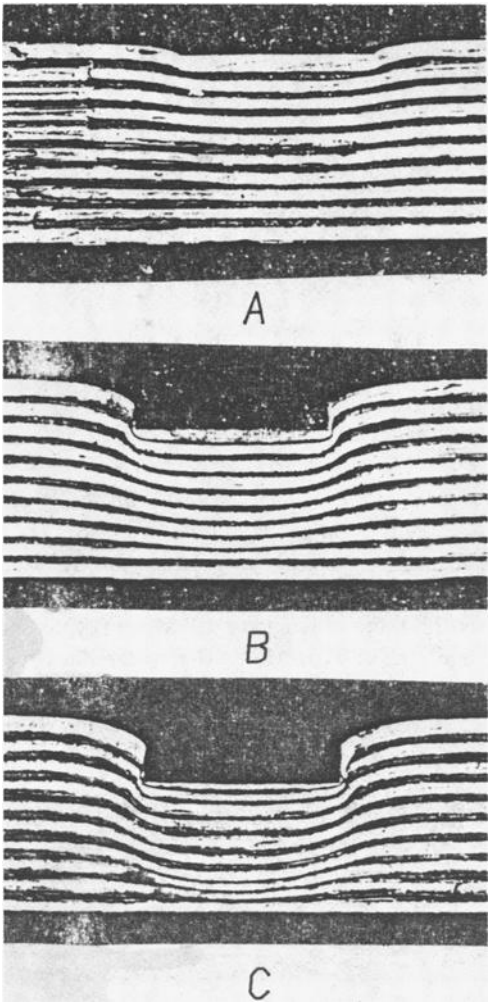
Single tool shear (forging) of hot low-carbon specimens: A = 284; B = 385; C = 426 MPa.
